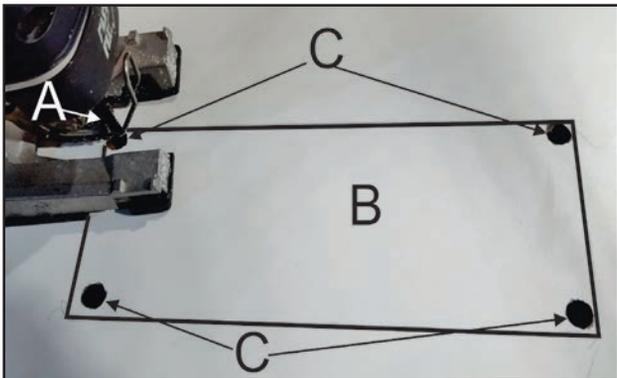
Drill the hole for the saw blade, "A", inside the desired hole dimension. For square a hole, "B", you can drill a hole in each corner, "C", and connect the dots.
